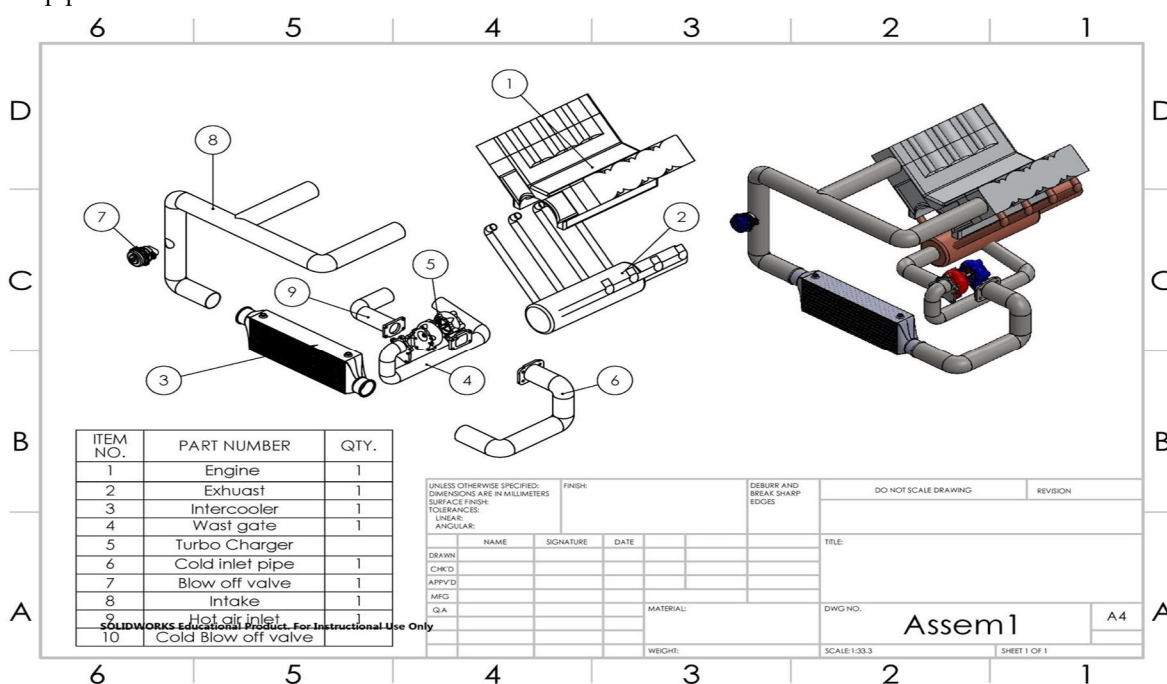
13: Assembly of Engine (SOLIDWORKS).
